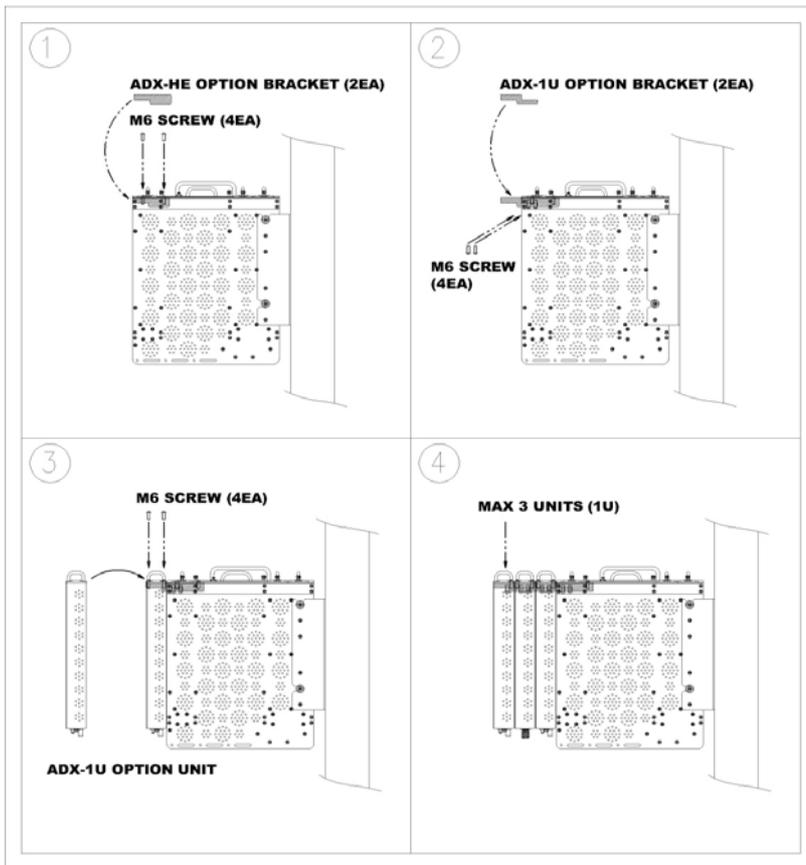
Wall Mount Instructions for ADX-HE added 1U Unit
